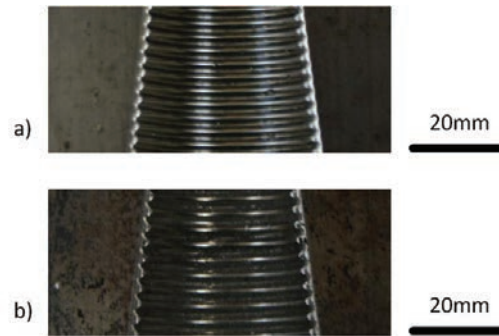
Structured tools after forming with $v_f = 500$ mm/min; a) wet, b) dry.
